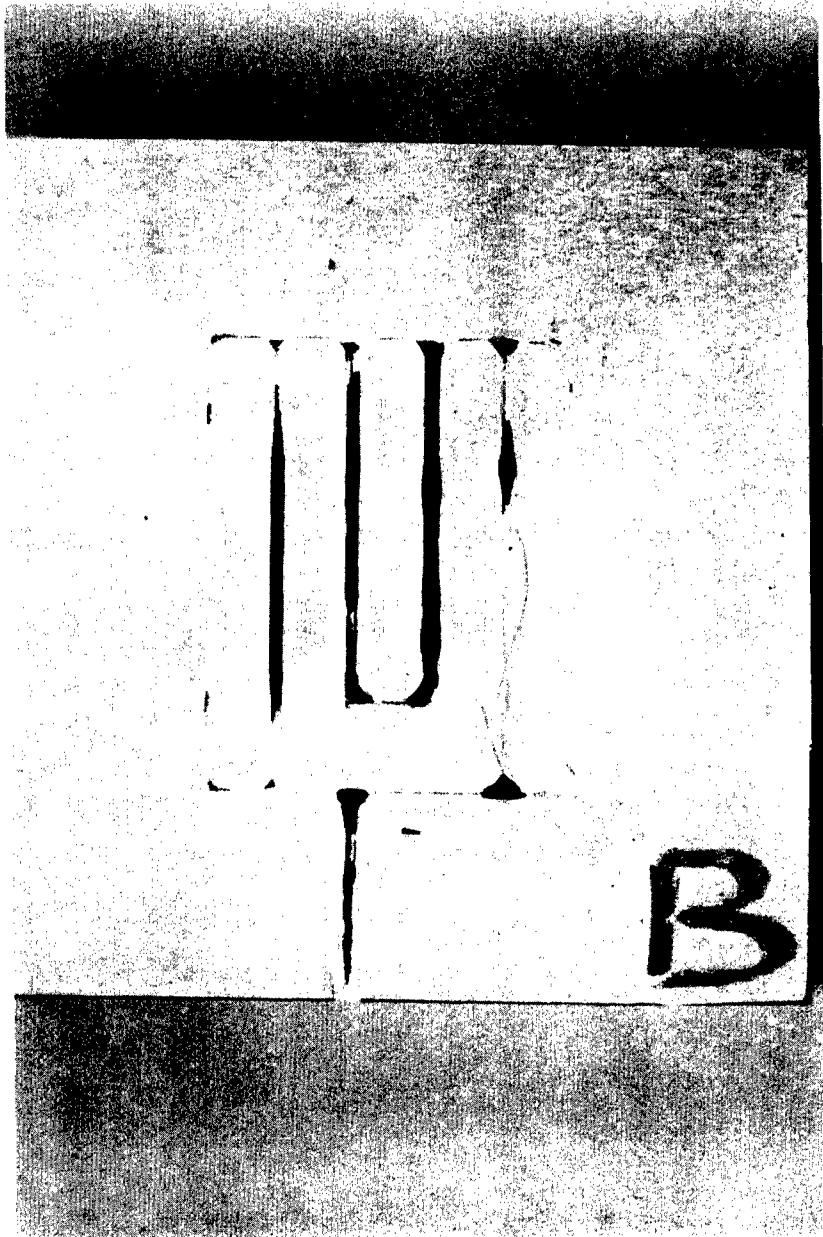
Electroplated U-700 Blocks Ground for Weld Test.
